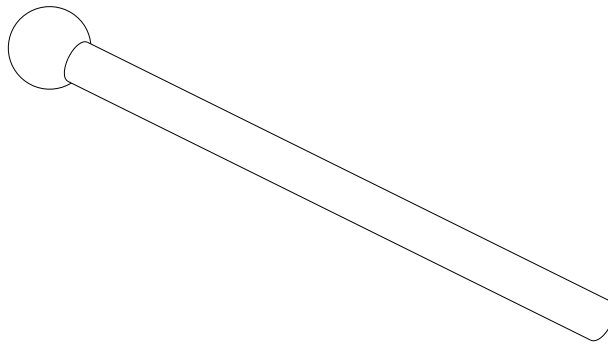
Illustration of the [P534694](#) or [P534695](#) Ball Valve Knock Out Tools
